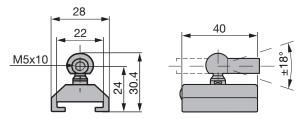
Installation dimensions of BTL5-F-2814-1S magnet
